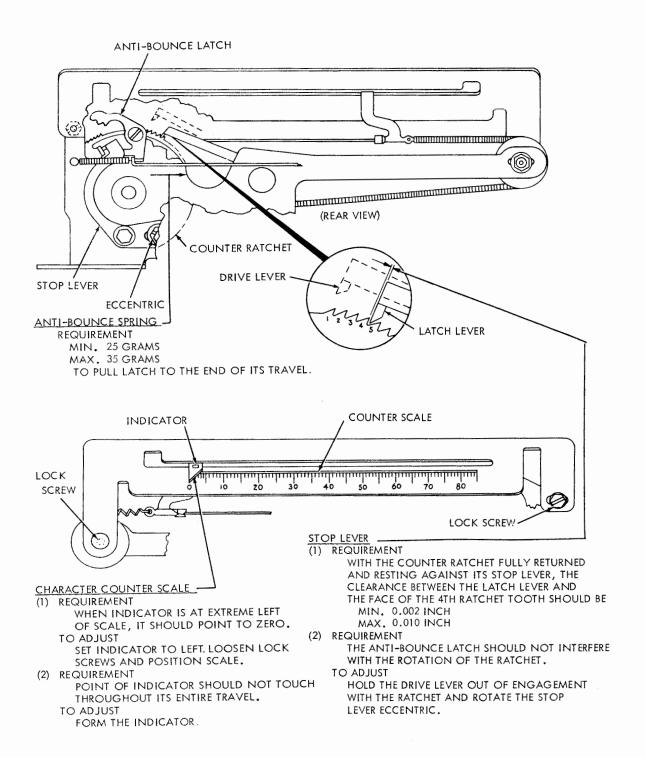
M. KEYBOARD TT-371/UG, CHARACTER COUNTER MECHANISM
